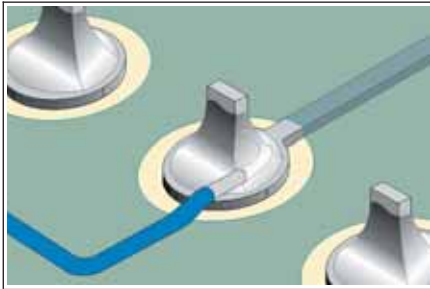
Acceptable Wire wrapped around component lead on solder side.
